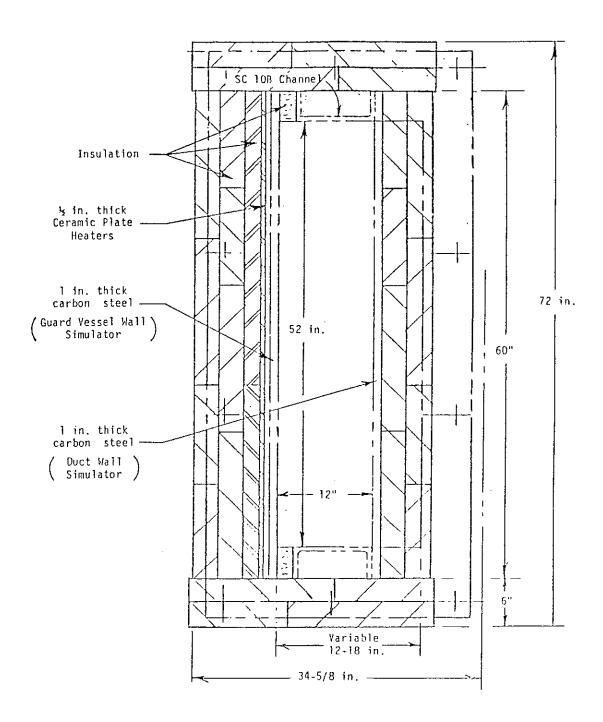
Cross-Sectional View of the Test Section/Insulation Subassembly.
